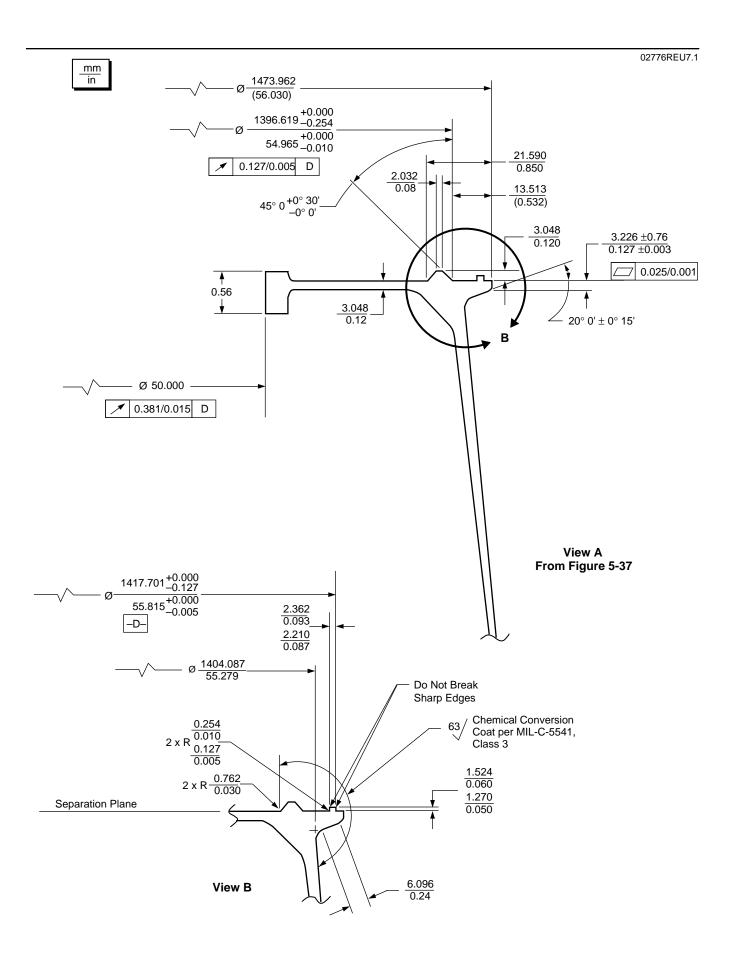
5624 PAF Detailed Dimensions (Download Figure)
